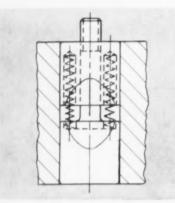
In this design, the clamp and bolt are forced apart when they are loosened.
